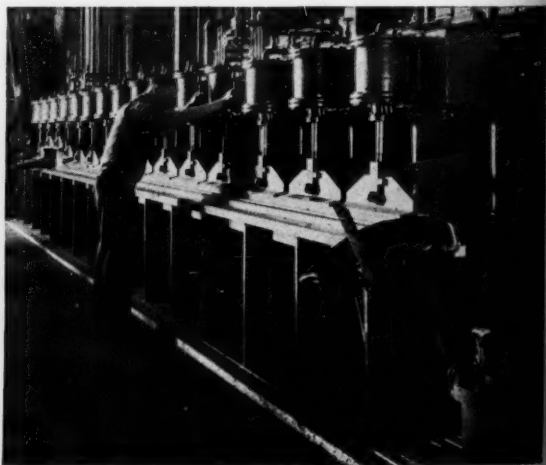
Air-operated press for baking and pressing the stator coils. The press is of welded steel plate.
